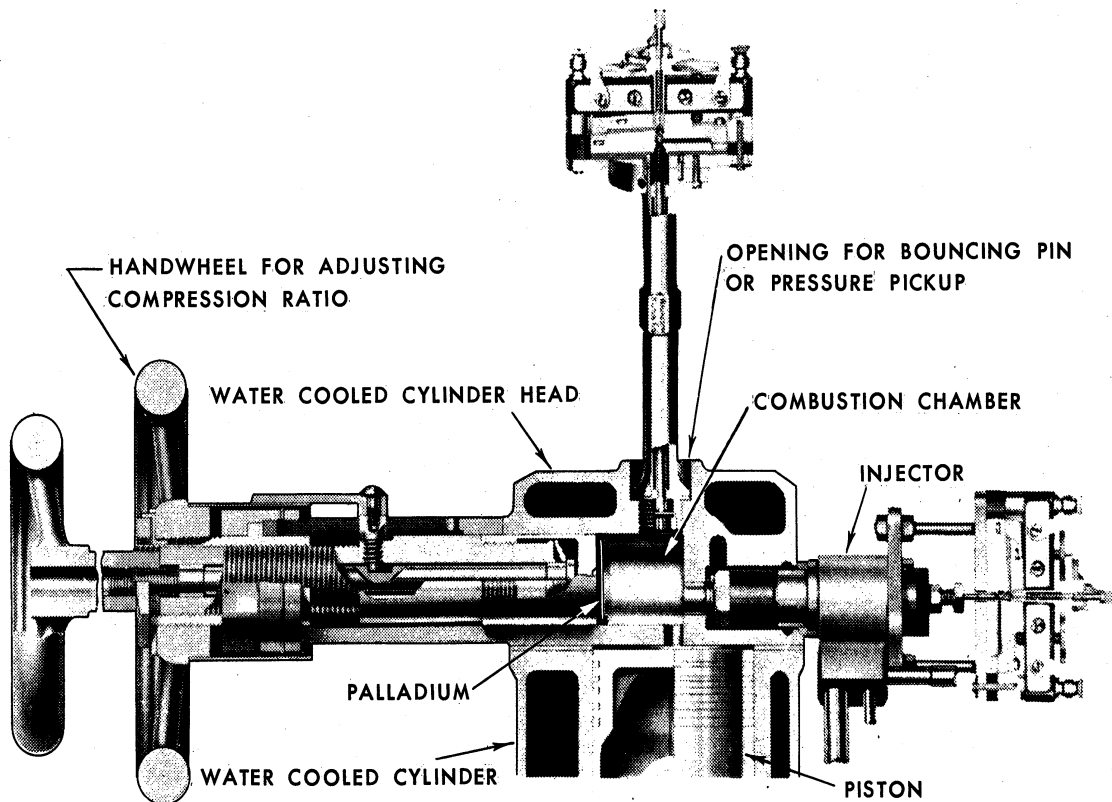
Sectional View of Combustion Chamber in CFR Engine
